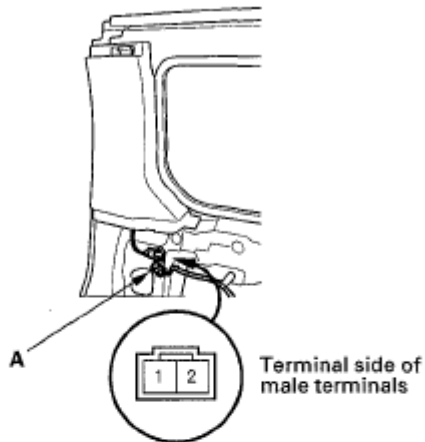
Identifying Door Lock Switch Mounting Screws And Door Lock Switch Terminals
